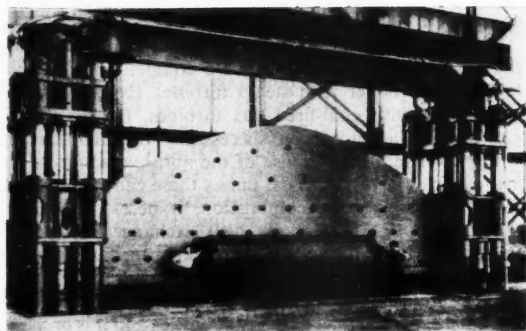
The largest boiler-plate bending press in the world, capable of cold-bending boiler plate up to 7 in. thick and in lengths up to 40 ft. (Courtesy, Combustion Engineering Co. Inc.)
